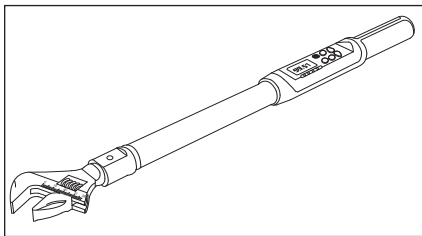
Use an HVAC torque wrench to ensure proper line nut connection torque.
